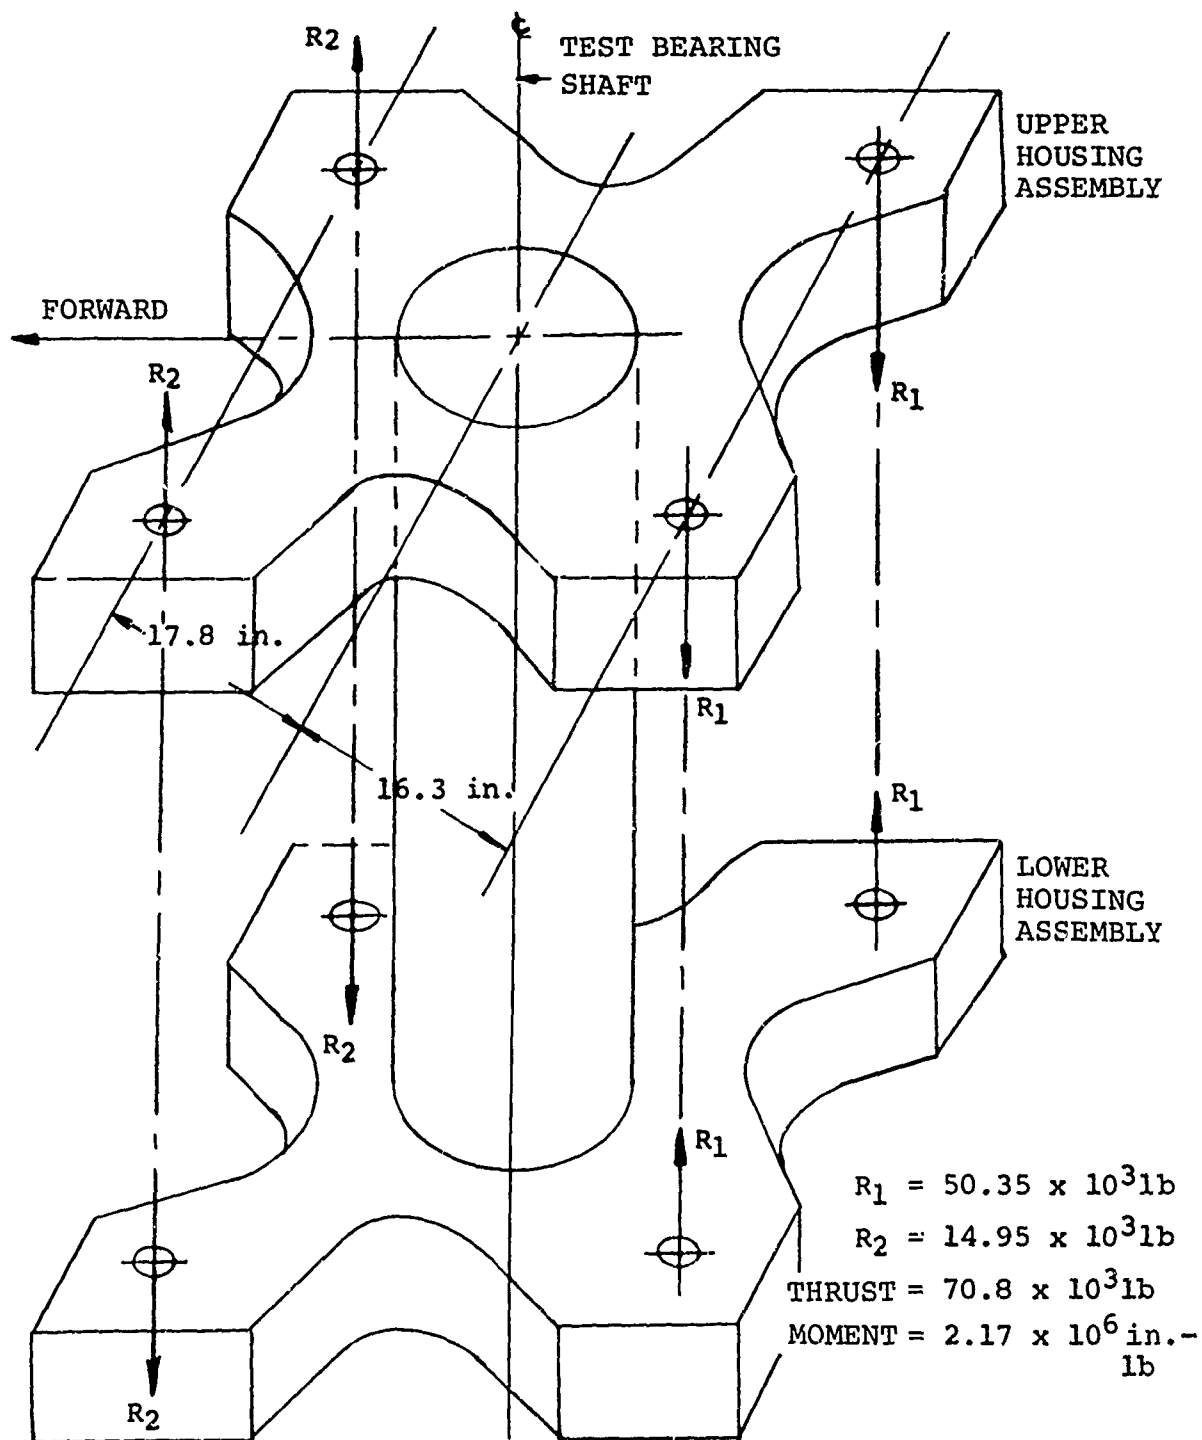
Aft Rotor Shaft Test Loading Schematic.
